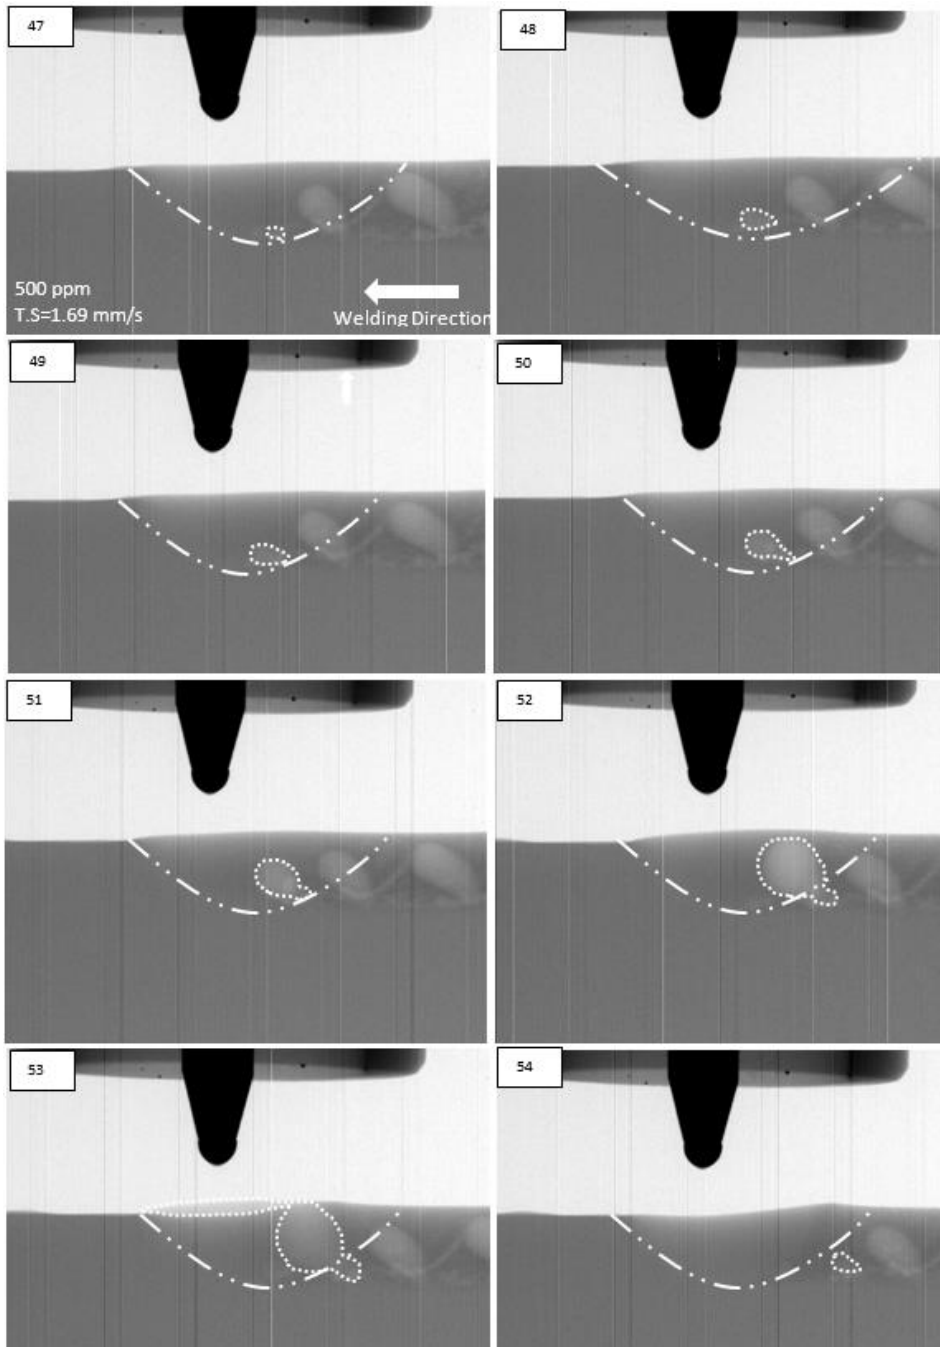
Alloy 1100 welded using 500 ppm shielding gas hydrogen at a travel speed of 1.69 mm/s, shows pore formation at the bottom of the weld pool and pore gas escape.
